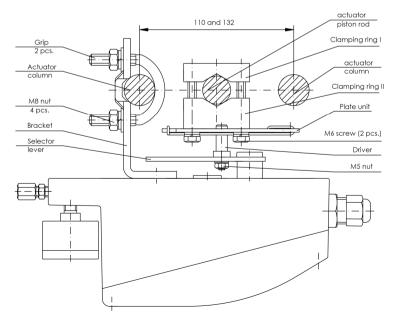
APIS-100-... type positioner with mounting set APIS-A000 (positioner assembled on column actuator of P or R type with columns axle base 110 and 132 mm manufactured by Polna S.A.).
